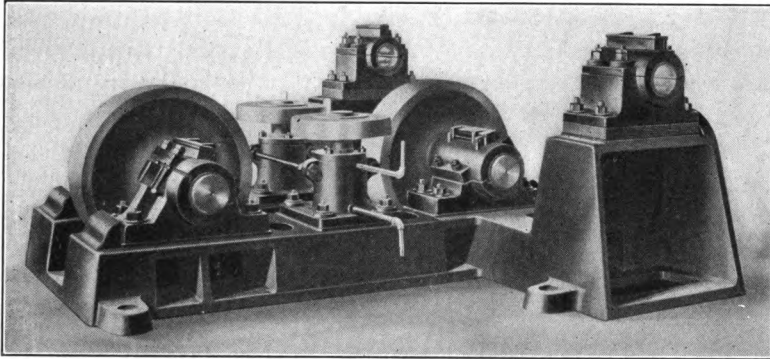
Abbé bed plate for tire-mounted tube mill.
